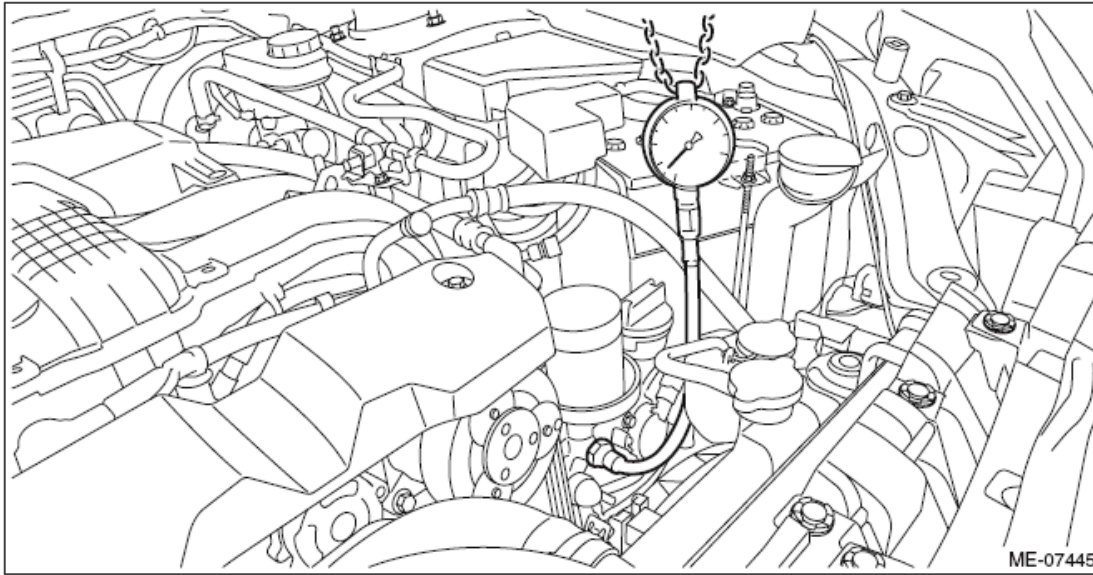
Installing Oil Pressure Gauge To Chain Cover
